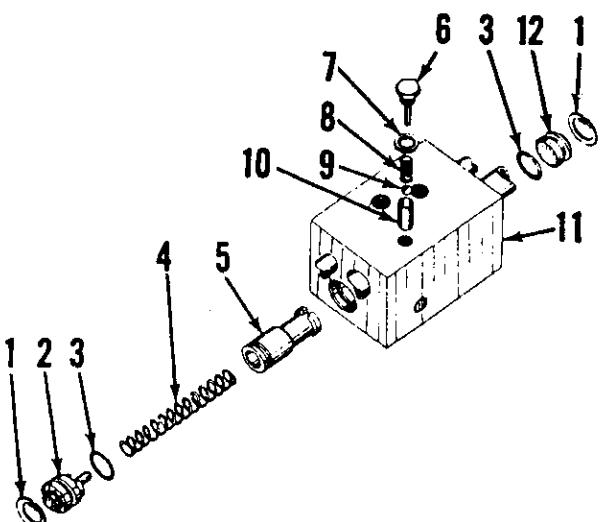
Exploded view of early Series B-414 flow control and relief valve assembly used with single stage pump.
